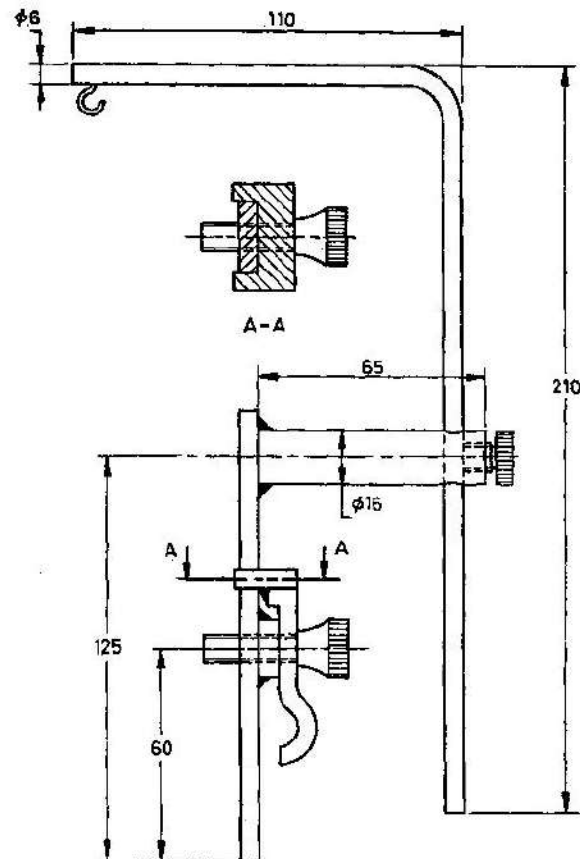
DIMENSIONS FOR MEASURING CYLINDER (BRASS)
